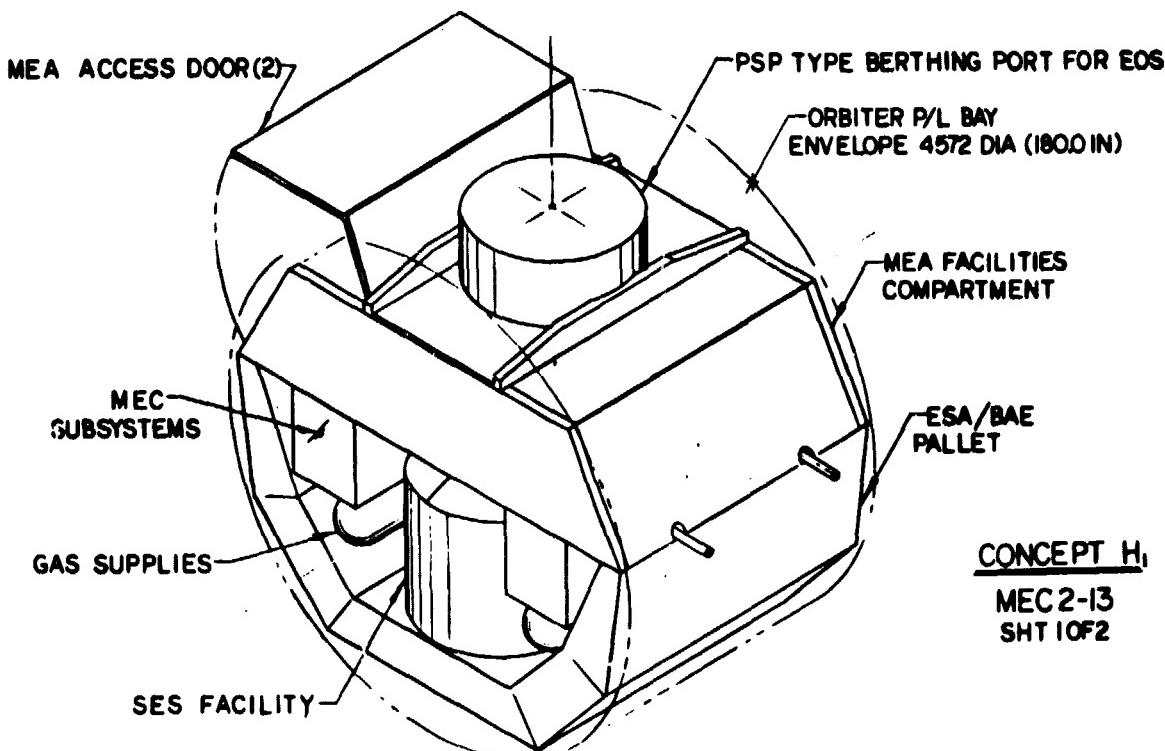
Concept H₁ (Drawing MEC2-13 - Page 1)
